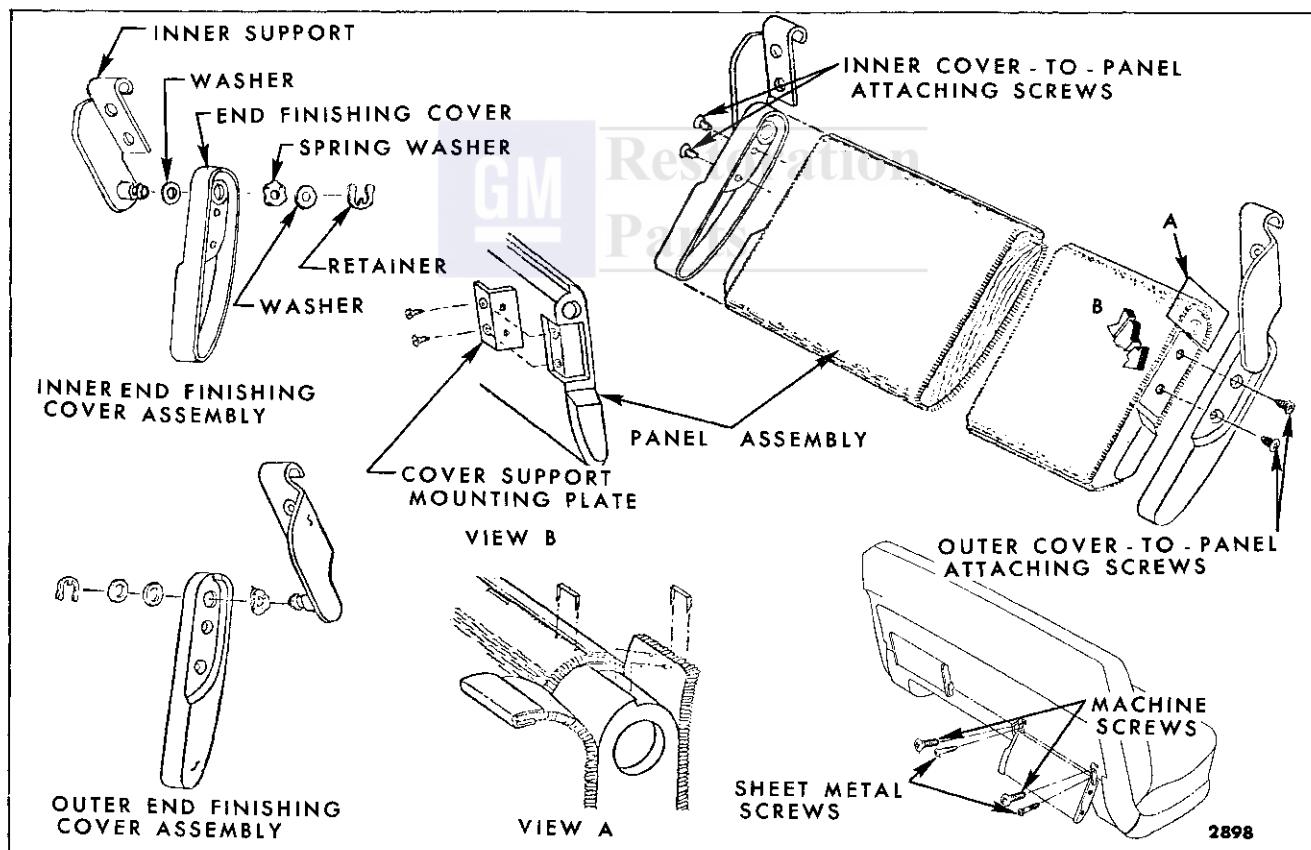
Foot Rest Assembly - Cadillac 68169 Style
